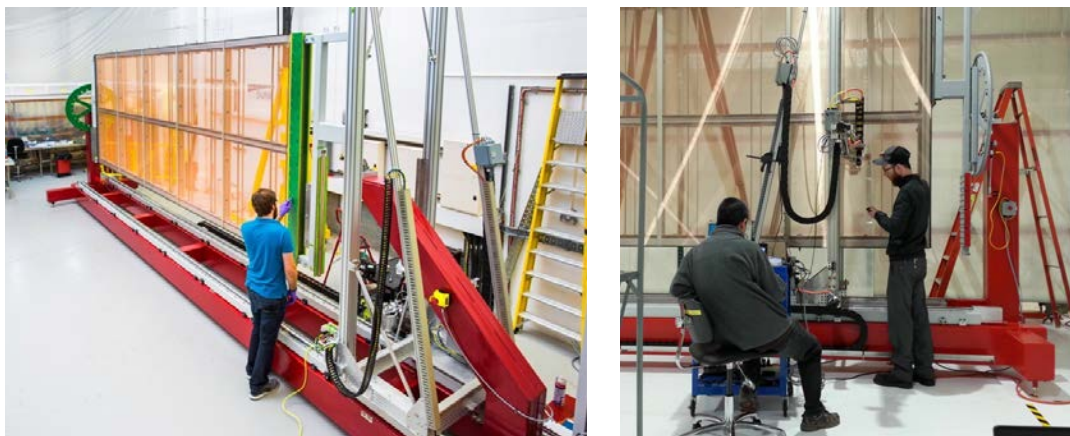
Left: partly wired ProtoDUNE-SP APA on the winding machine at Daresbury Lab, UK. Right: partly wired ProtoDUNE-SP APA on the winding machine during wire tension measurements at PSL.
